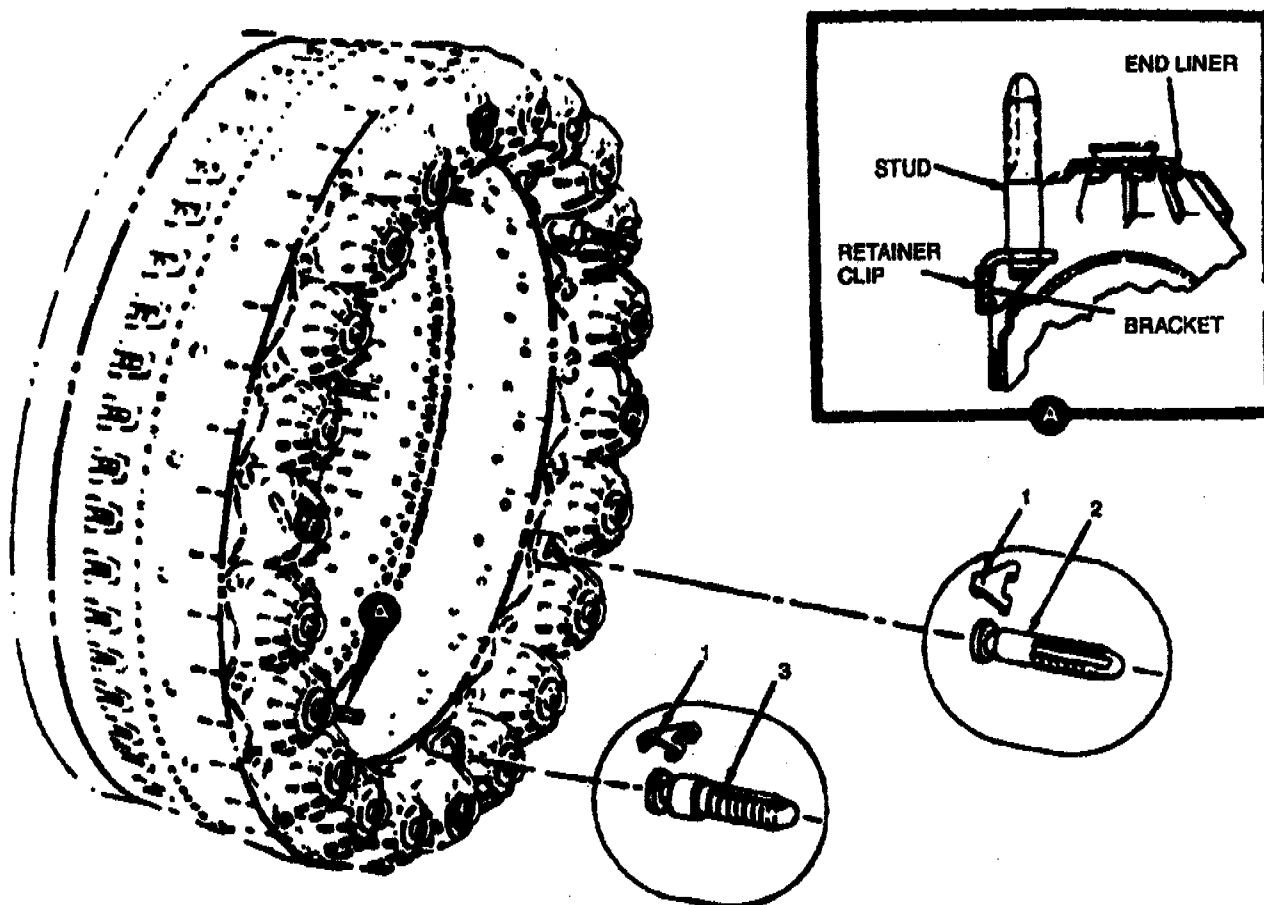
Combustion Chamber Housing Inspection Locations.
